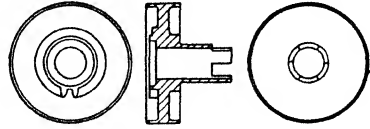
A cross-section to scale of the white metal alloy counter disc squeezed from a flat blank.
